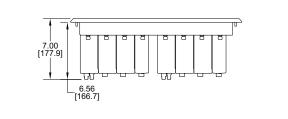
SEL-2240 Dimensions for Dual 4-Slot Rack- and Surface-Mount Chassis
